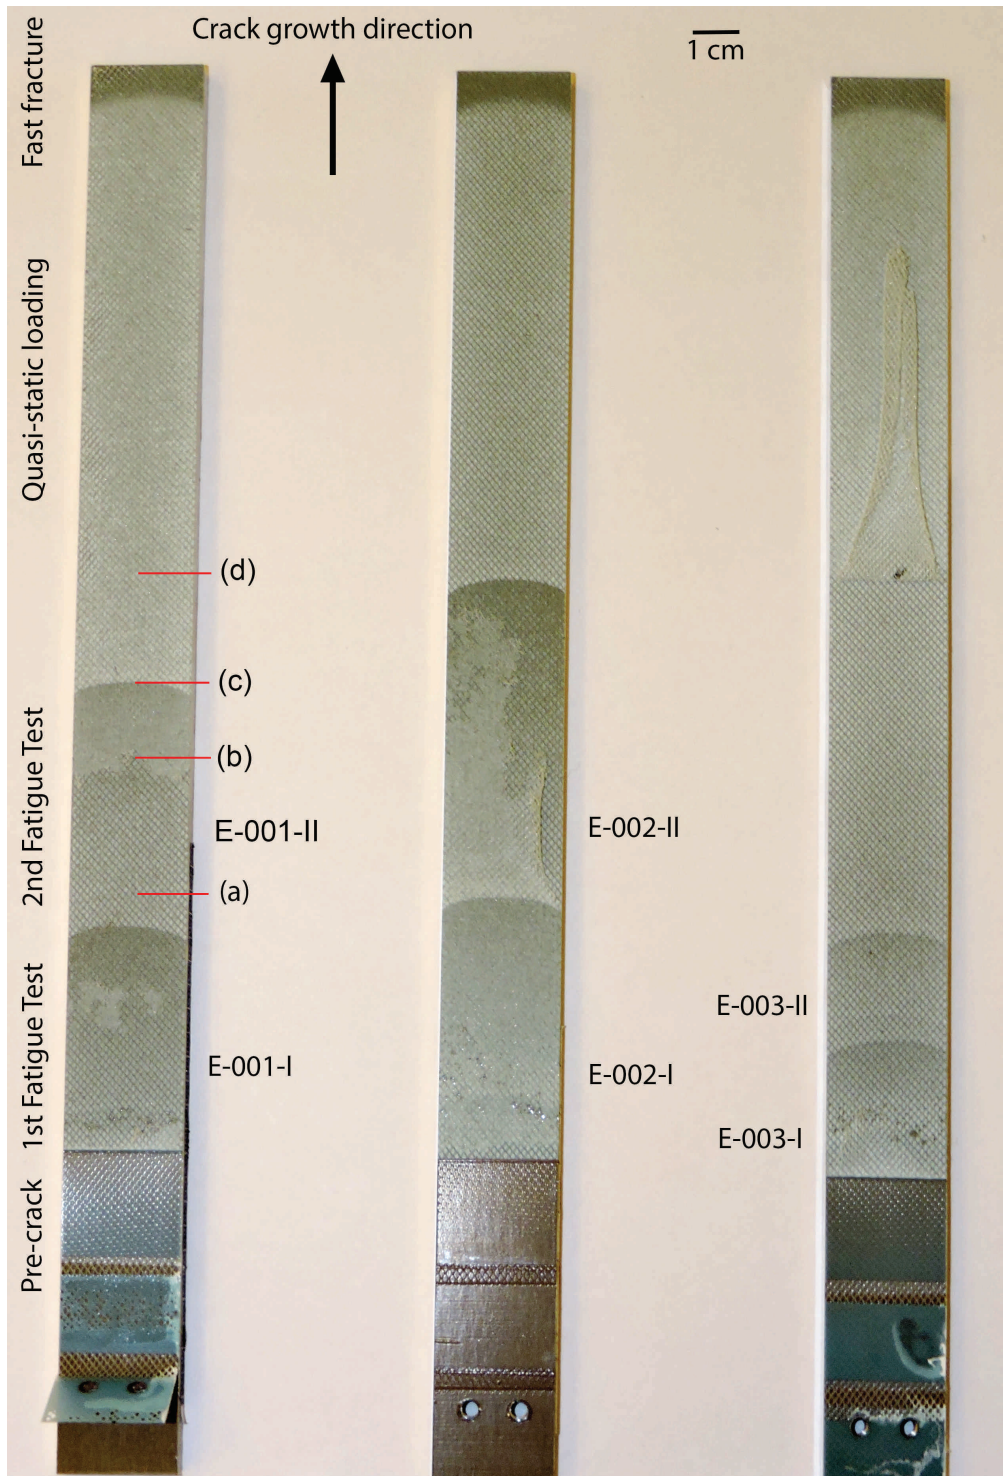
Macroscopic view of the fracture surfaces for the lower halves of the series E specimens. Two fatigue tests were performed on each specimen. The associated crack growth areas have been labelled in the figure. After completion of the second fatigue test, quasi-static loading was applied to separate the specimens, resulting in a large area of stable crack growth and a small area of unstable fast fracture. The approximate location of the magnified views shown in figure 4.22 is indicated by the letters in parentheses. The crack growth direction was from the bottom of the picture to the top.
